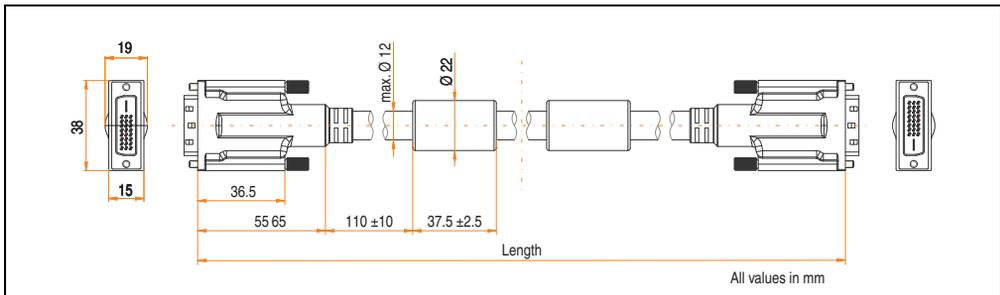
Dimensions - SDL flex cable 5CASDL.0xxx-03
